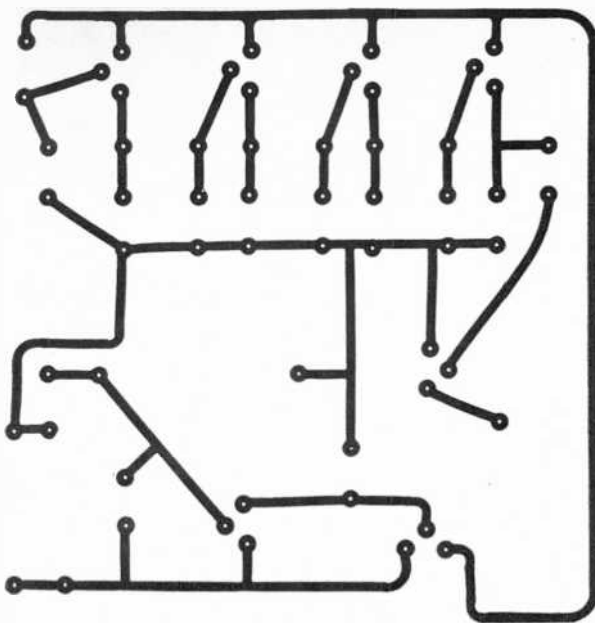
You can use the foil pattern at left to make up a printed circuit or assemble components on perf board.
